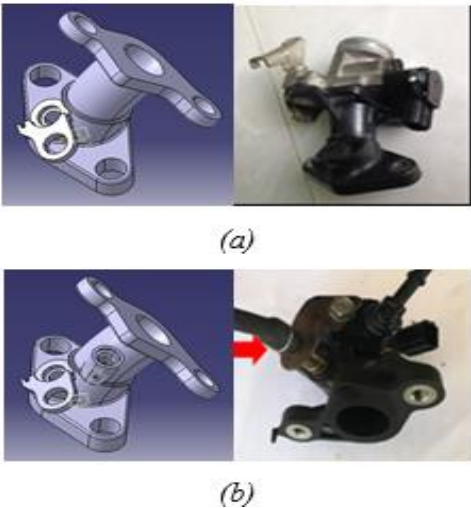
a - Original intake manifold, b - modified intake manifold for NH₃ injector installation
